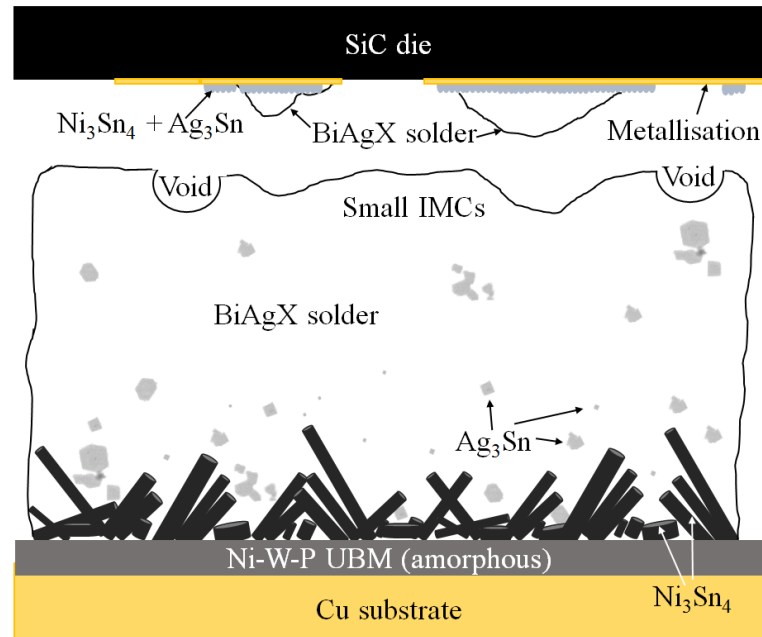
Schematic diagram of the failure characteristics of as-built BiAgX solder joints.
